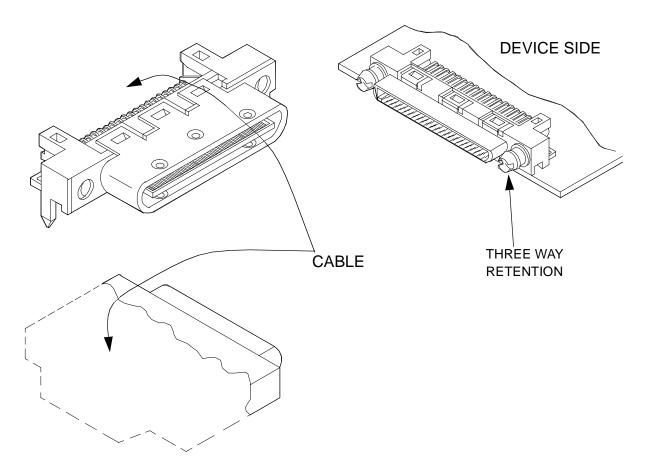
68-contact alternative 4 shielded SCSI device connector (P cable)
